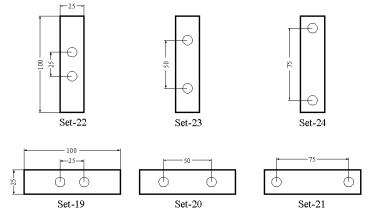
Specimen set numbers, cross section of the rails and placement of the dowels when rail depth was 100 mm constant (dimensions mm)
